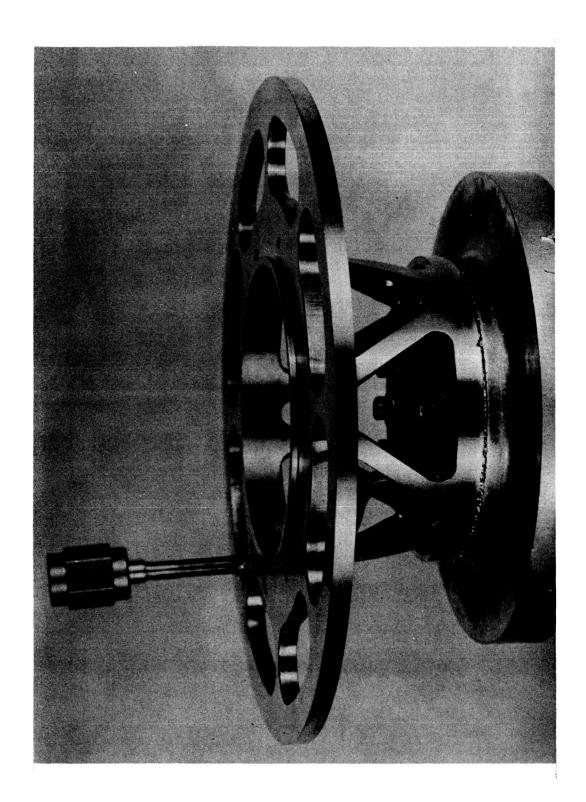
100-lb Injector After Electron Beam Welding
